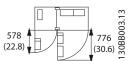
Space in front of IP21/IP54 enclosure type, frame size F9
